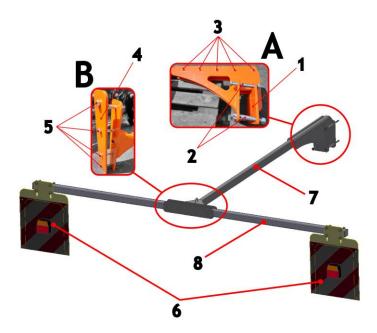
Construction of the lighting support for hydraulically folded disc harrows (1 - fixing plate, 2 - fixing bolts, 3 - bolts connecting the support profile, 4 - fixing plate, 5 - fixing bolts, 6 - lighting boards, 7 - support profile, 8 - lighting bar)
